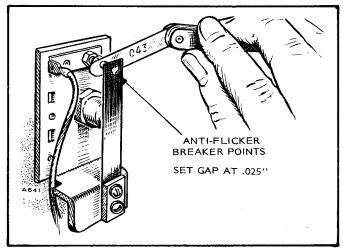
SETTING ANTI-FLICKER BREAKER POINTS
